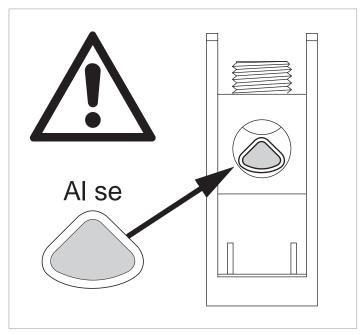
Correct position of sector-shaped aluminum cables (1)
